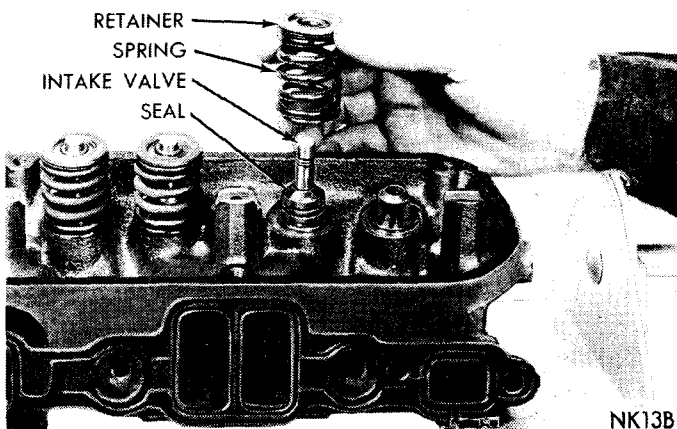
Installing Valves, Cup Seats, Springs and Retainer
